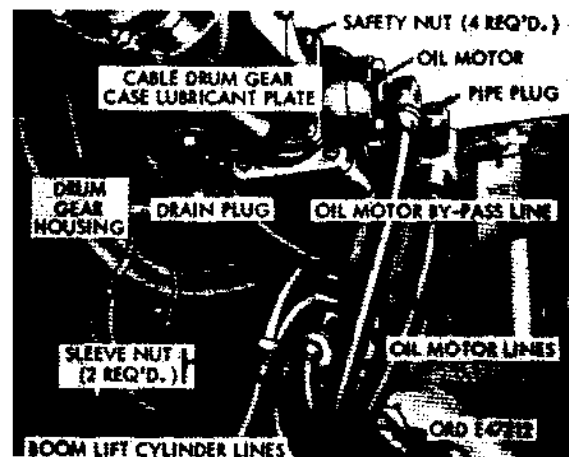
Disconnecting boom hoist hydraulic oil motor lines
